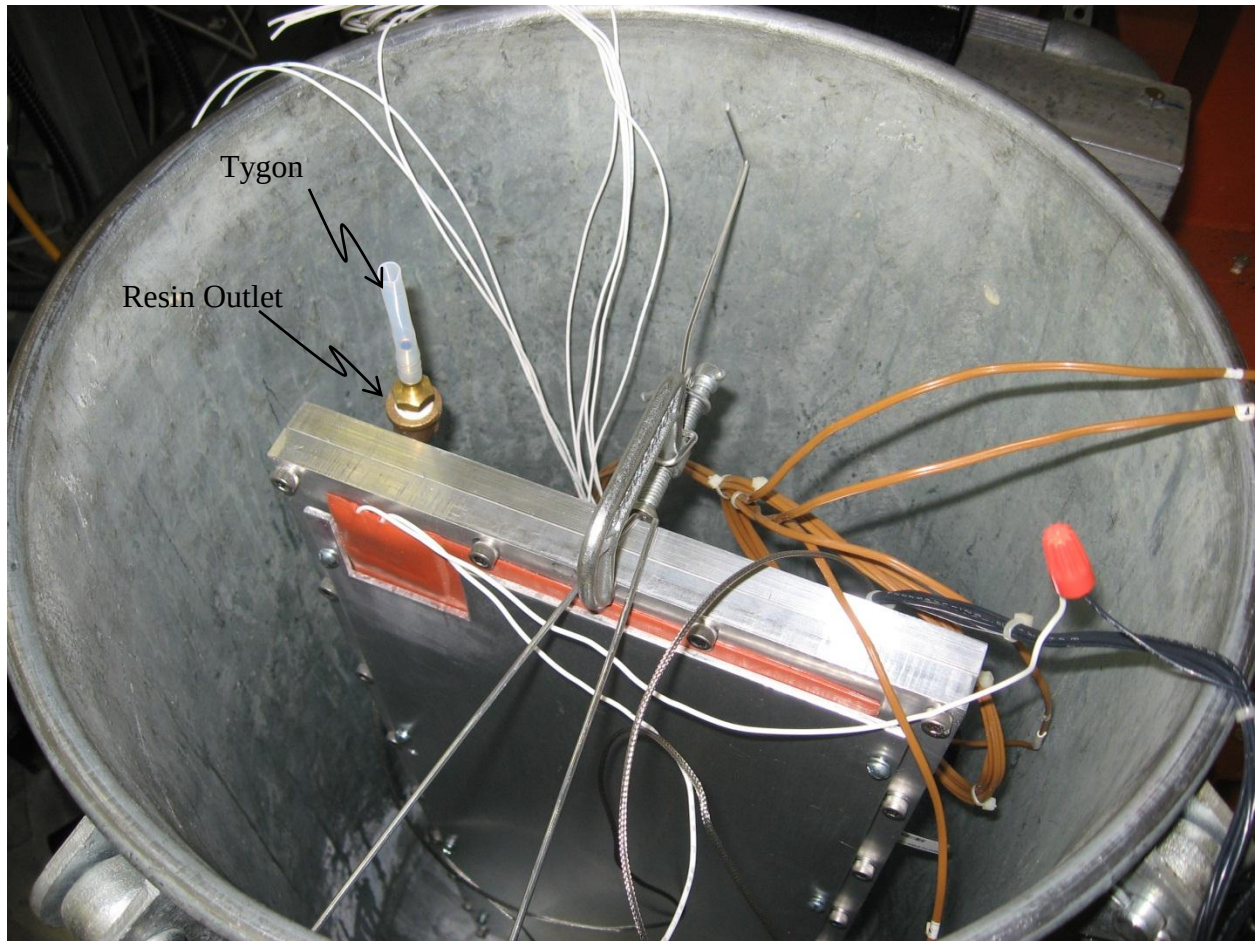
Positioning of sample mold in mold tank. The mold assembly was held in a vertical position.
